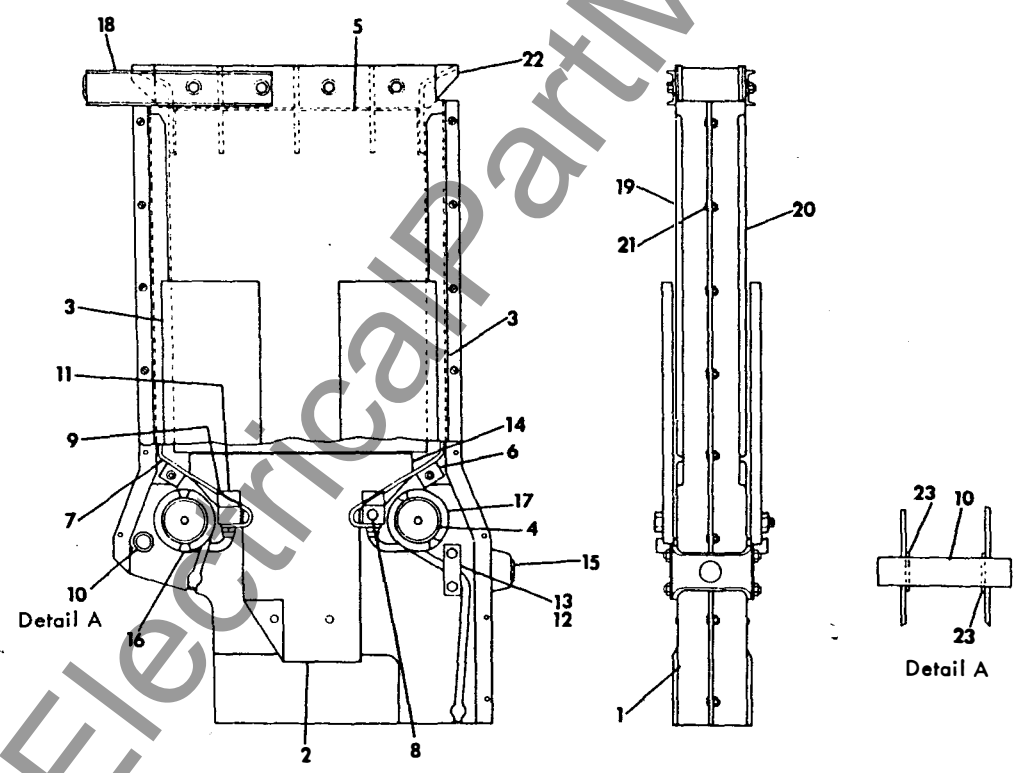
Type MA-75C and MA-250 Arc Chute Assembly
